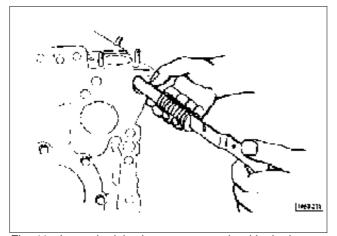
Insert the injection pump control rod in the its seat in the cylinder block along with pressure spring and stop cap. Make sure it is free to move inside the guide supports;
